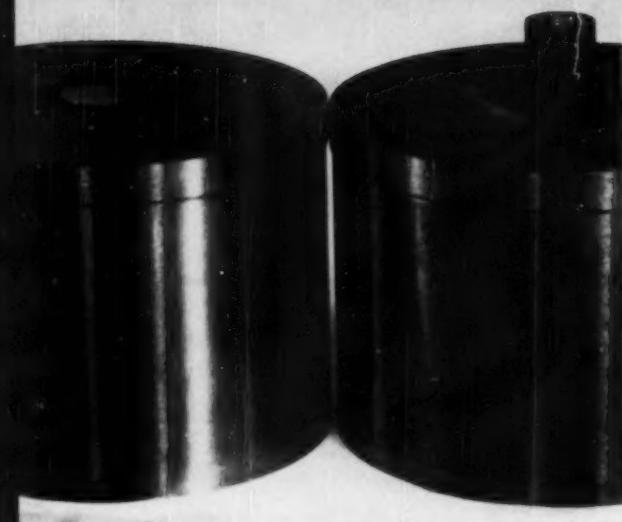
Four-Inch Diameter Rolls Made of Manganese Oil Hardening Steel. Cracked at junction of body and journal due to poor design, with heavy section adjacent to light section. These rolls should be made up as a two-piece assembly or from an air hardening steel
